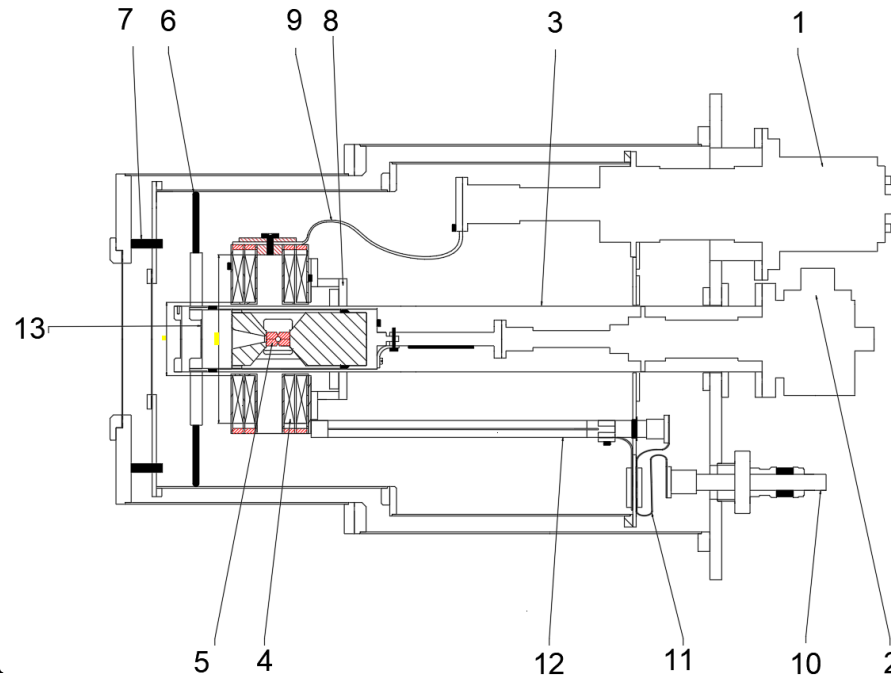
cryostat. 1 – cryocooler, cold head SRDK 408S; 2 – insert - cold head SRDK 101D with heater; 3 - shaft with an internal diameter of 78 mm; 4 – magnet coils; 5 – container with a high-pressure chamber; 6, 7 – fiberglass limiters; 8 – holders; 9 – flexible aluminum heat conductor; 10 – 300A feedthroughs; 11 – copper current leads; 12 – HTSC current leads; 13 – neutrons input window
